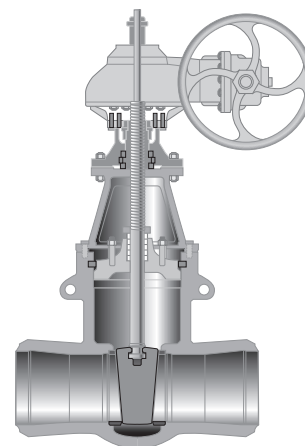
WE* Parallel Seat Disc, Butt Weld Ends
